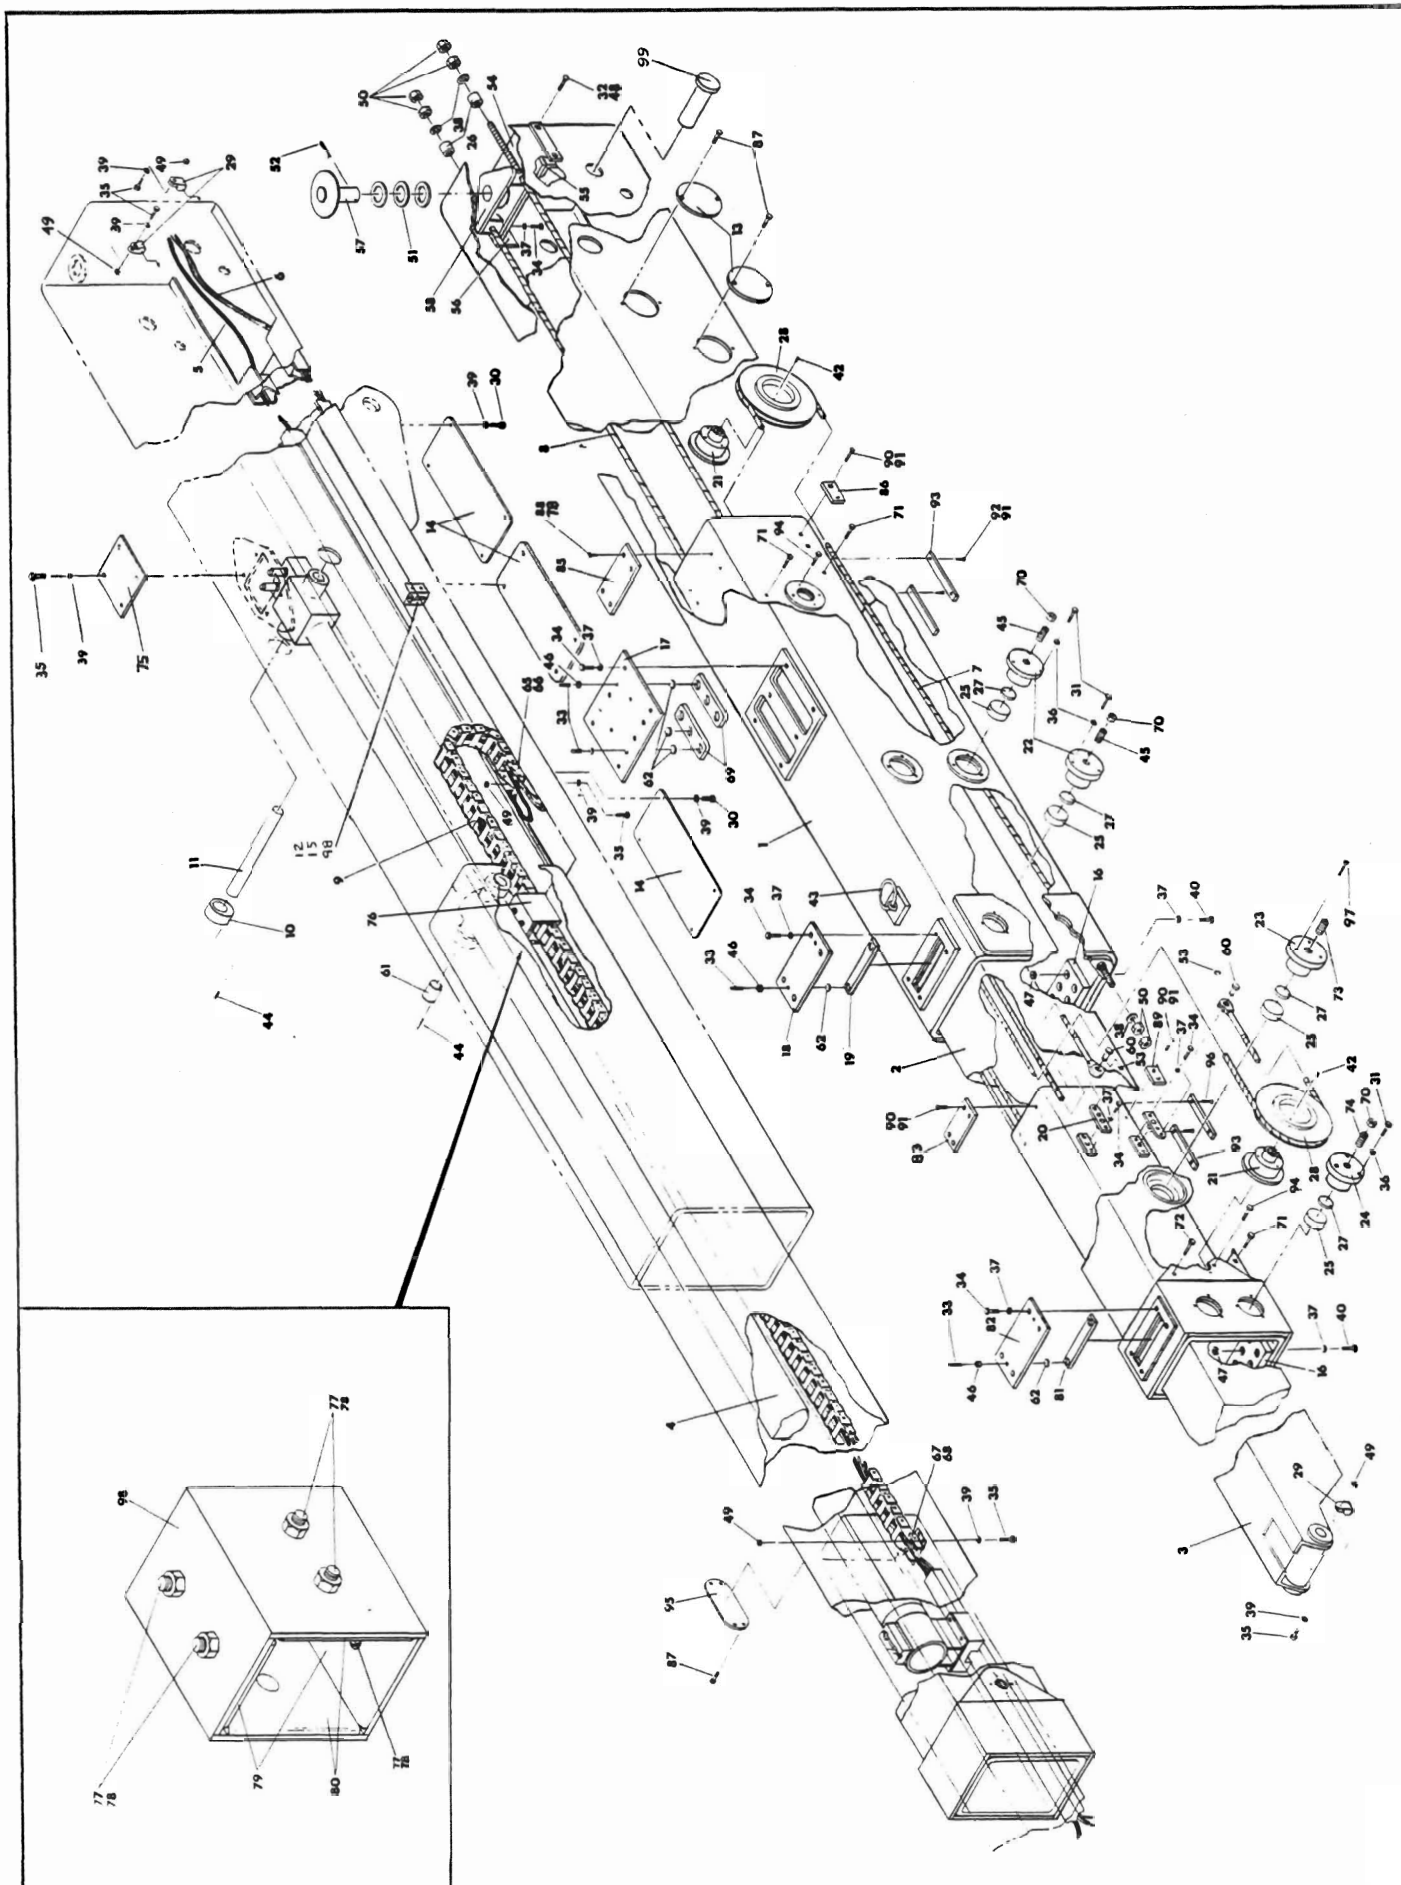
A - BOOM EXTENSION CYLINDER (50)
